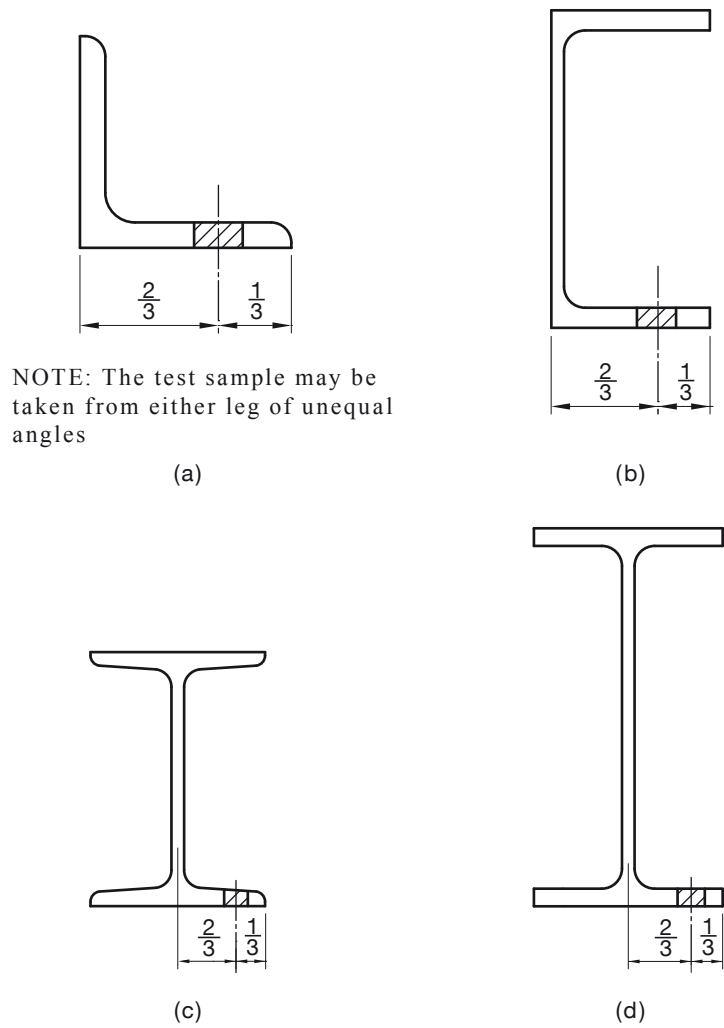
POSITION OF TEST SPECIMENS AND TEST PIECE NOTCH LOCATION FOR IMPACT TESTS
